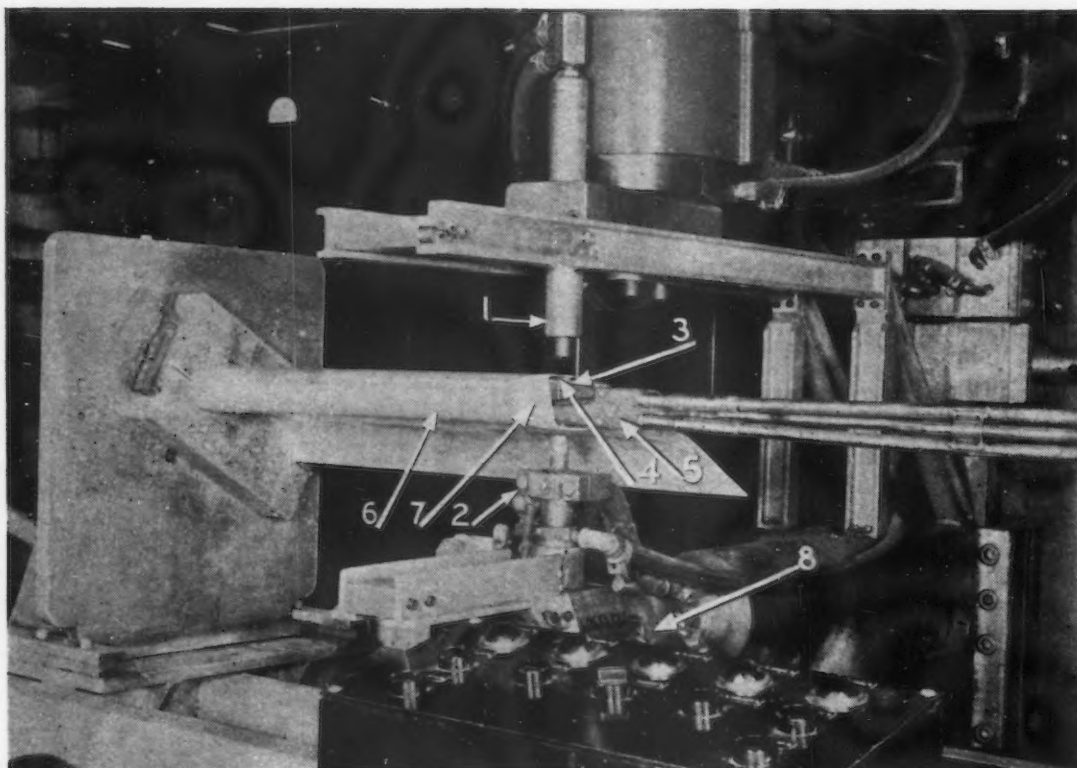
The landing flap deflector was cut away to show: 1 and 2—Upper and lower retracting electrodes; 3—internal wedge, expanding electrode assembly; 4—replaceable inner electrode tip; 5—Micarta insulation pad; 6—deflector skin; 7—channel stiffener; 8—lower electrode retracting cylinder.
